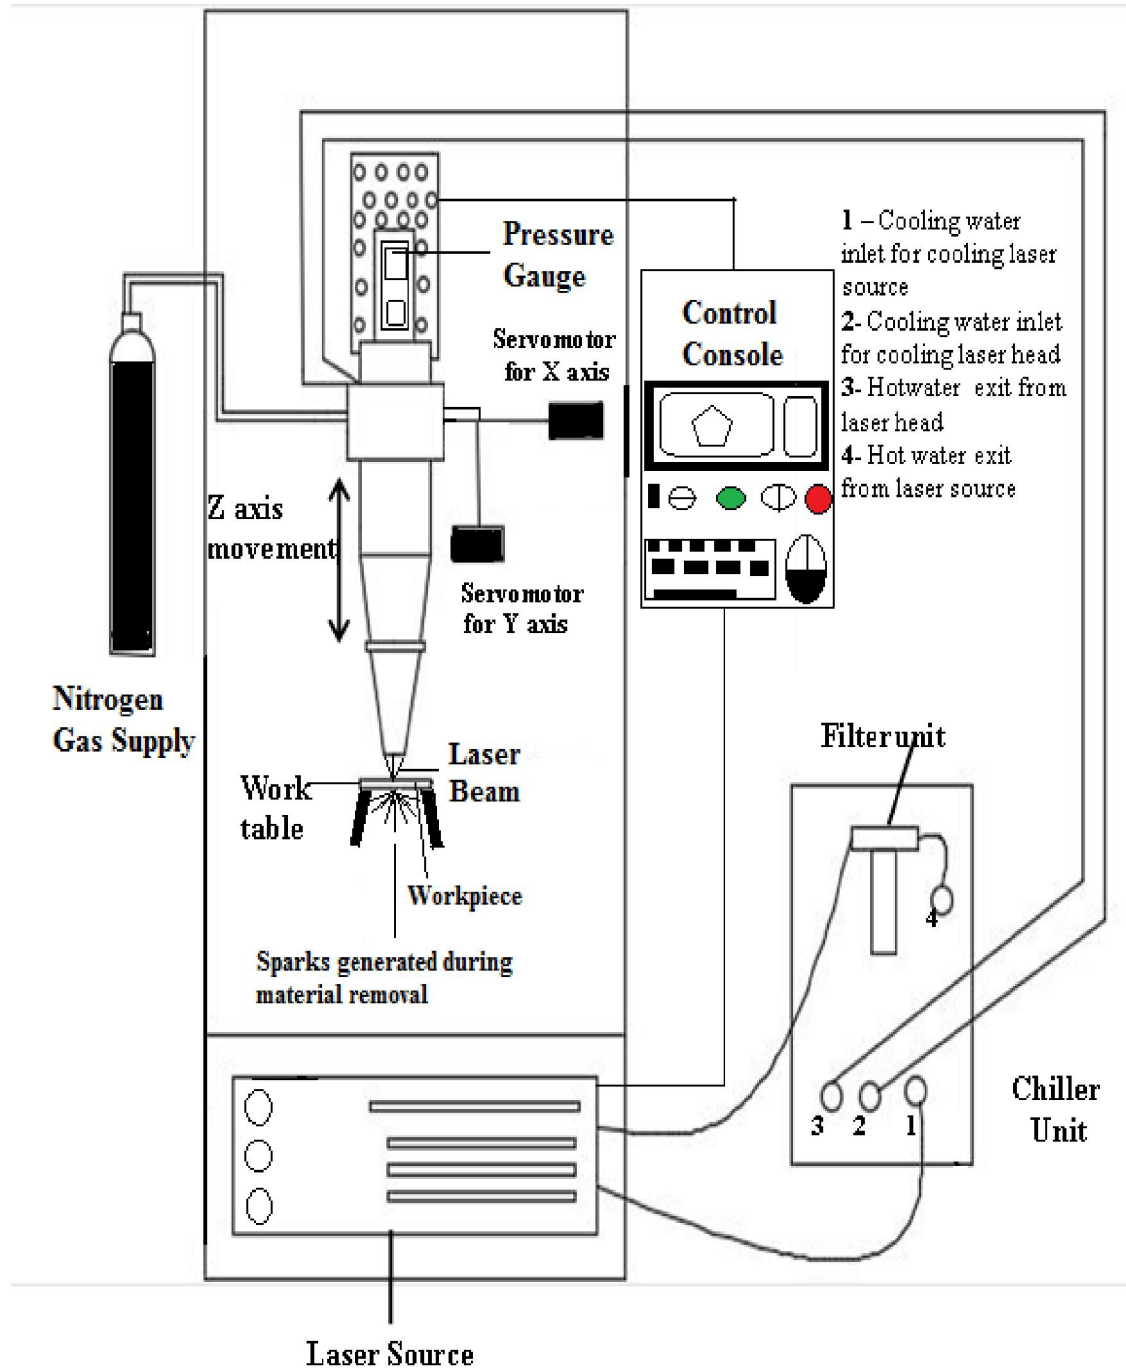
Schematic diagram of the fiber laser metal cutting machine
